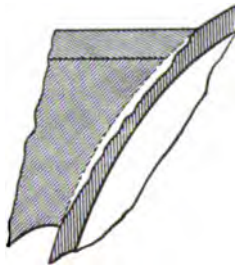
Corroded shell-plate of Lancashire boiler.
